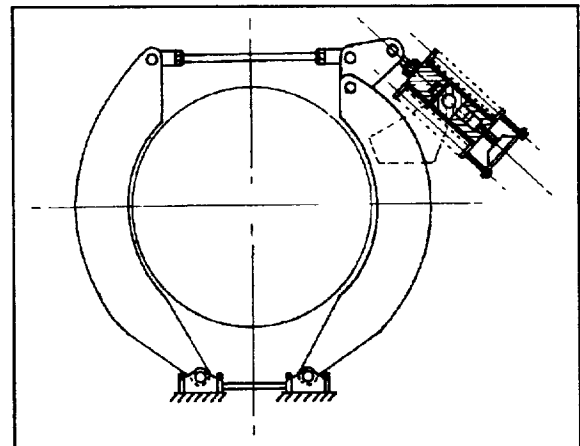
G.E.C. Calliper Type - High Pressure Oil Activated
